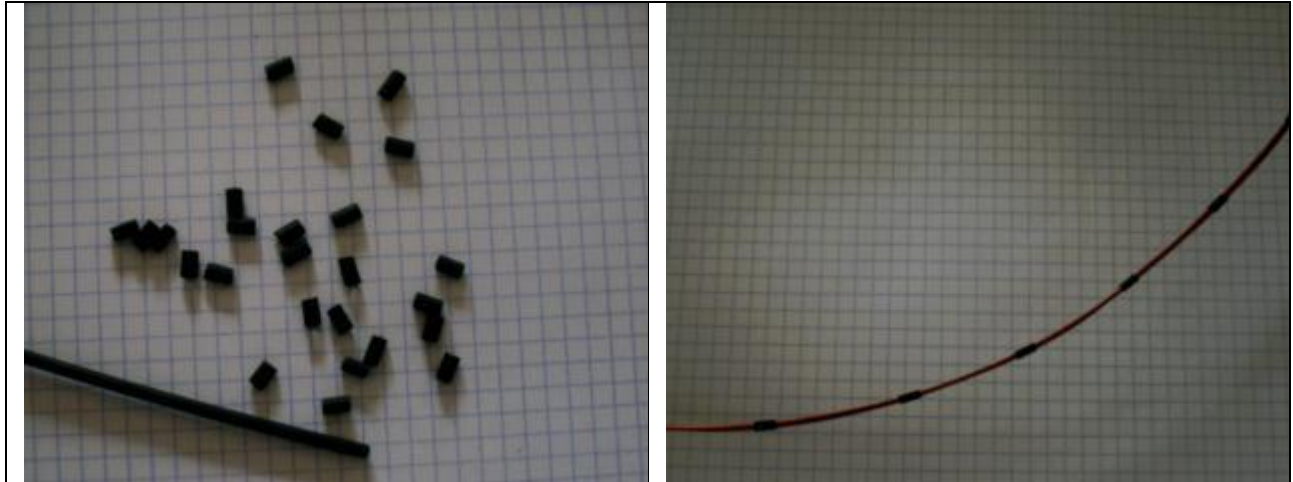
Using short pieces of heat-shrink sleeve to construct a parallel feedline
